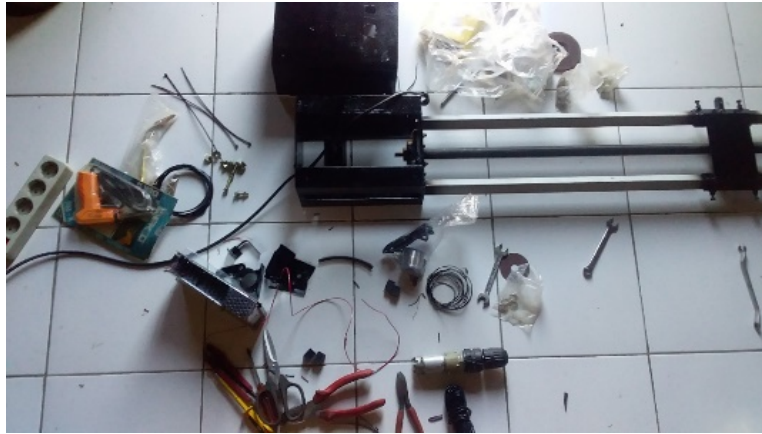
Assembly of components, bracket rails, frame, drive screw shaft, bracket
